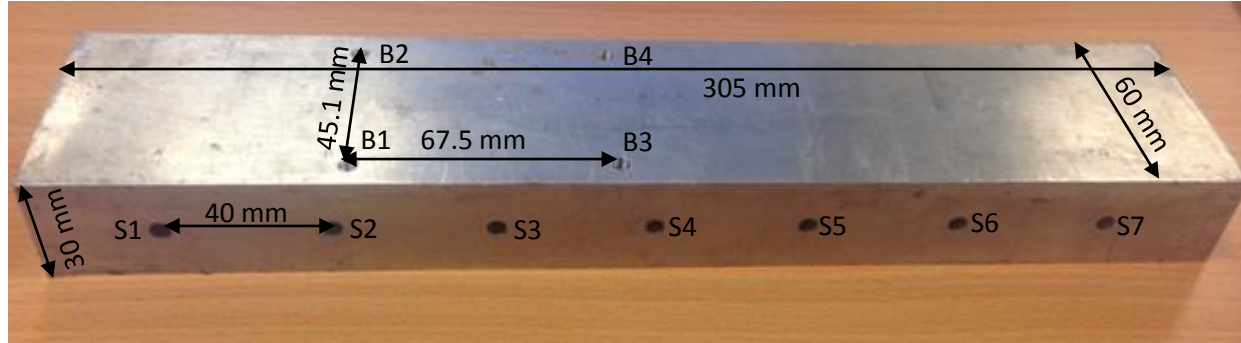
Test piece 2(S1-S7 are the side holes and B1 –B4 are the bottom holes)
